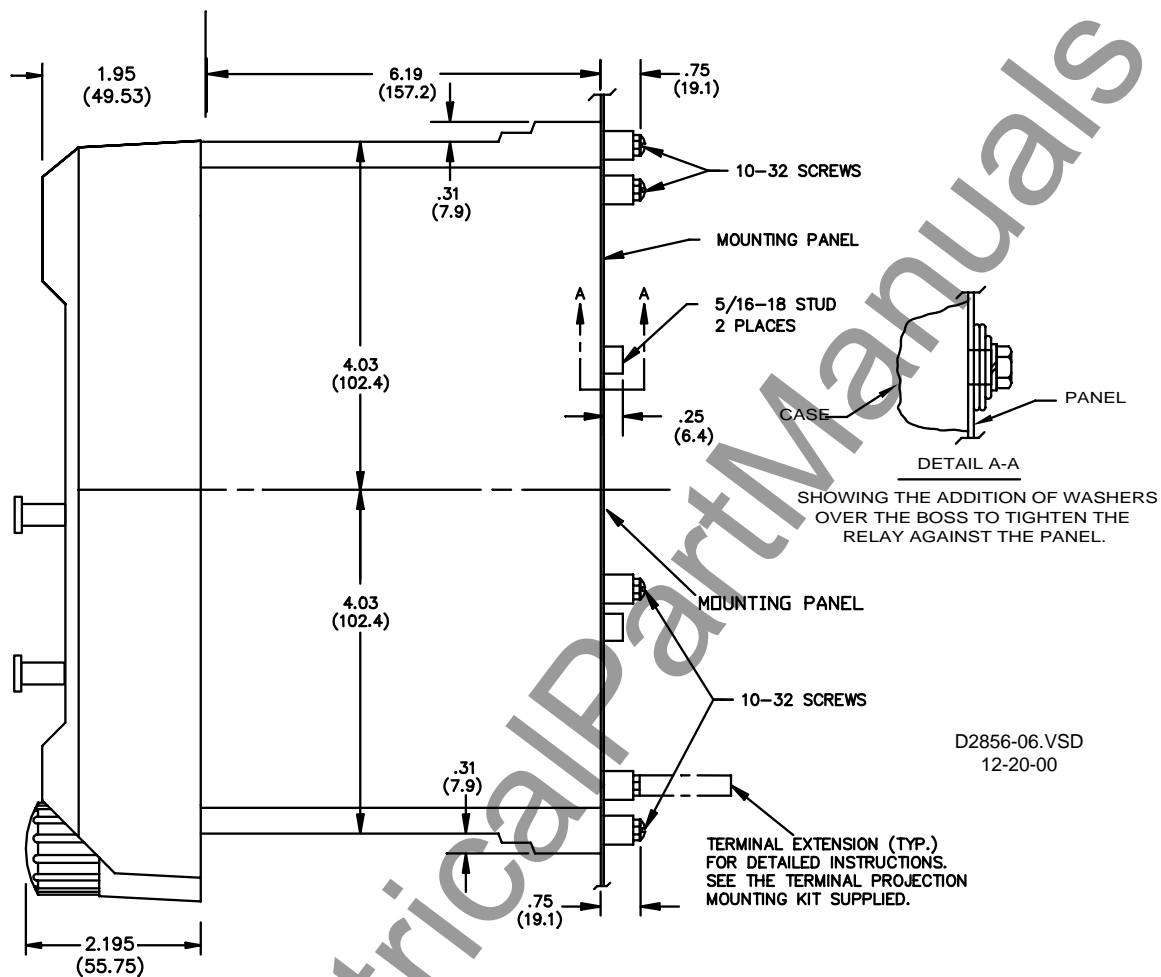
S1 Case, Double-Ended, Projection Mounting, Side View
